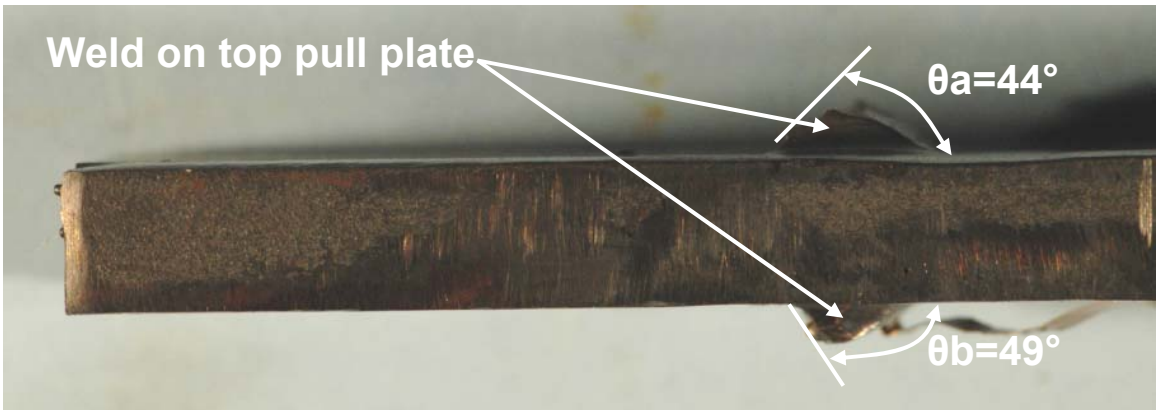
Photograph of a side view Specimen 5, where the profile of the fractured weld on the top pull plate is visible
